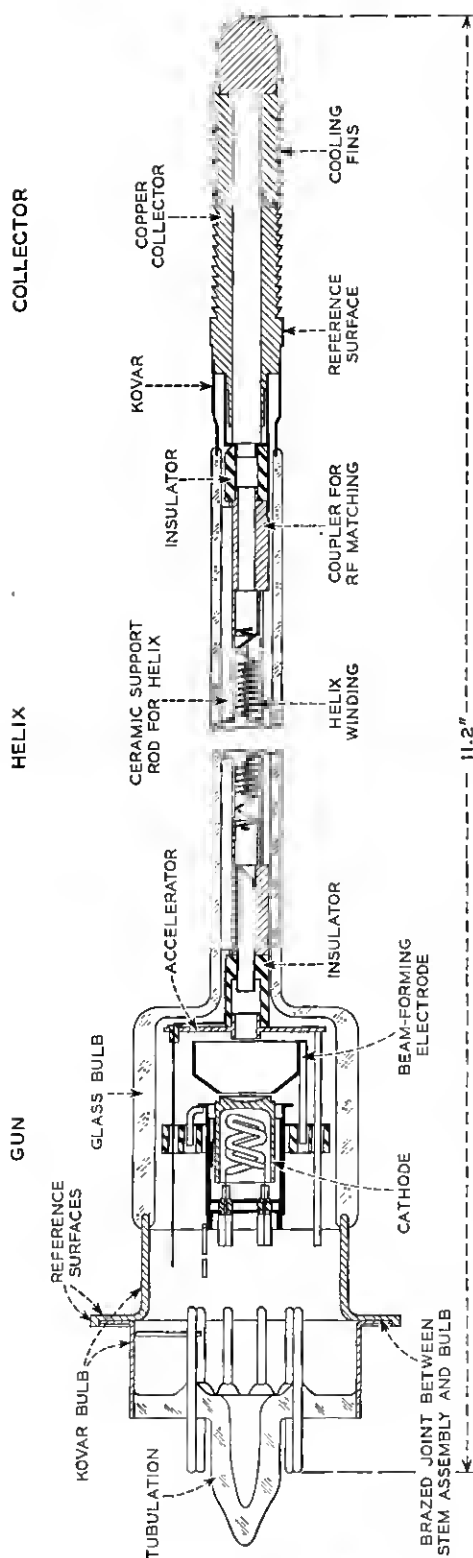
Simplified layout of the M1789. Detailed drawings of the various parts of the tube are shown in Figs. 8, 14 and 21.
